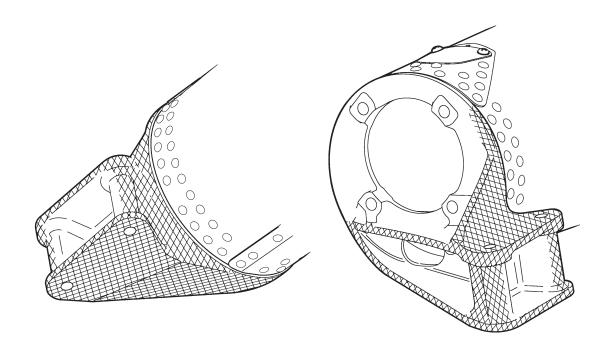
PENETRANT INSPECT CROSS-HATCHED SURFACES OF C148 BULKHEAD
